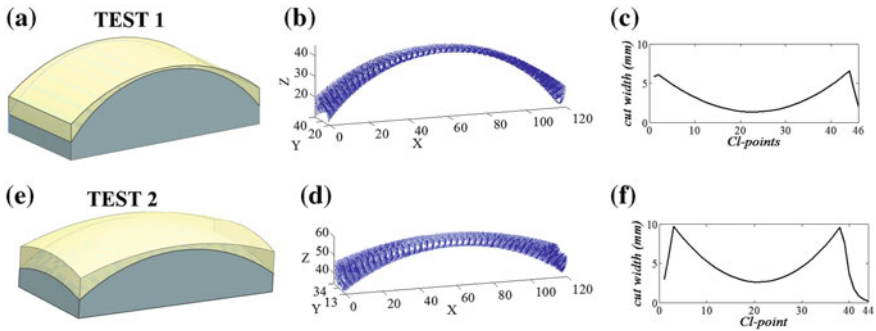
Model tests, a, b part and workpiece surface models, c, d cut shape, e, f cut width progression
